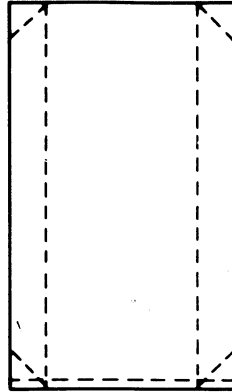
Open-mouth heat sealed gusseted sack with corner seals
